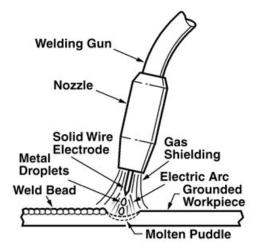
Gas Metal Arc Welding (GMAW).
